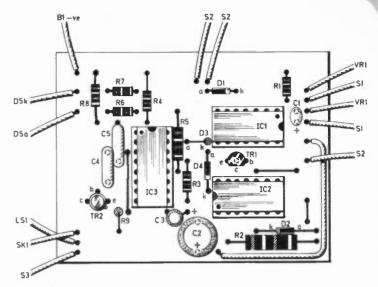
Layout of the components on the topside of the p.c.b. and wirlng details to other components.
